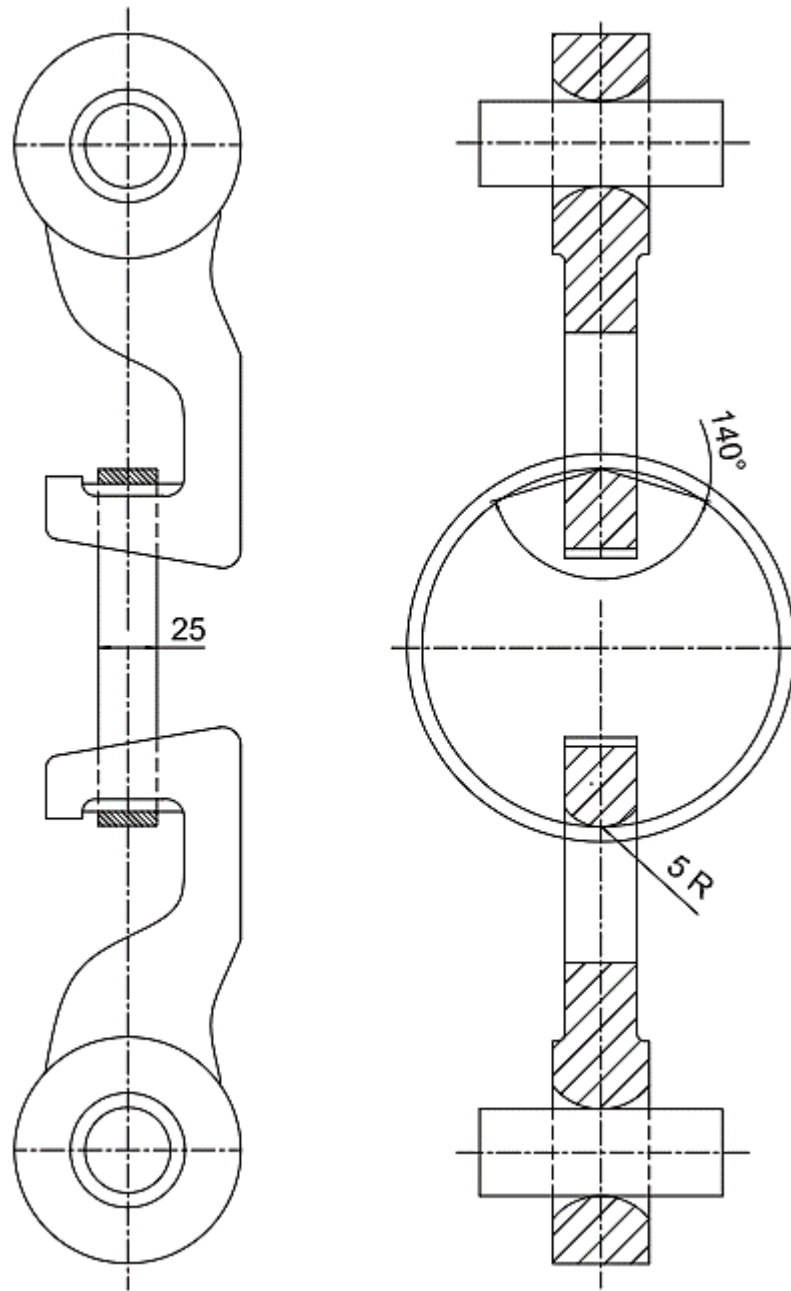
RING TEST FOR PIPES CENTRIFUGALLY CAST IN METAL MOULDS
